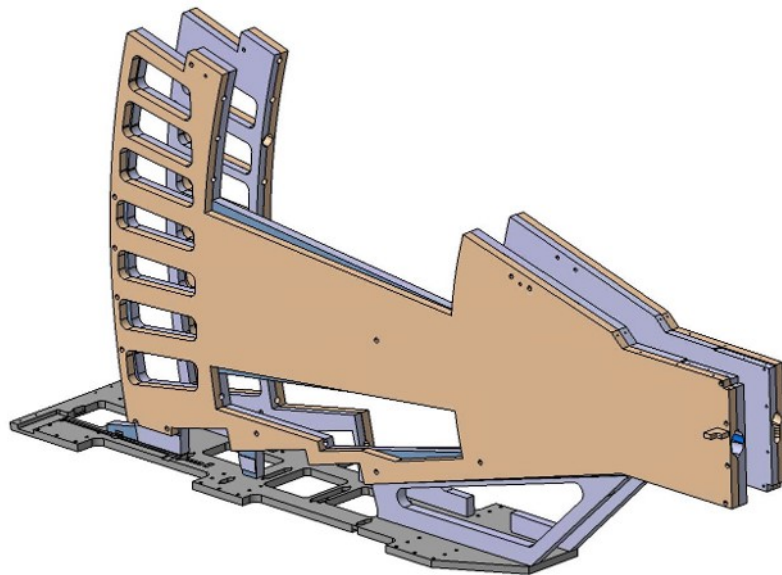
Ex-Port RNC collimator slab welded on the Base plate ([80]).
